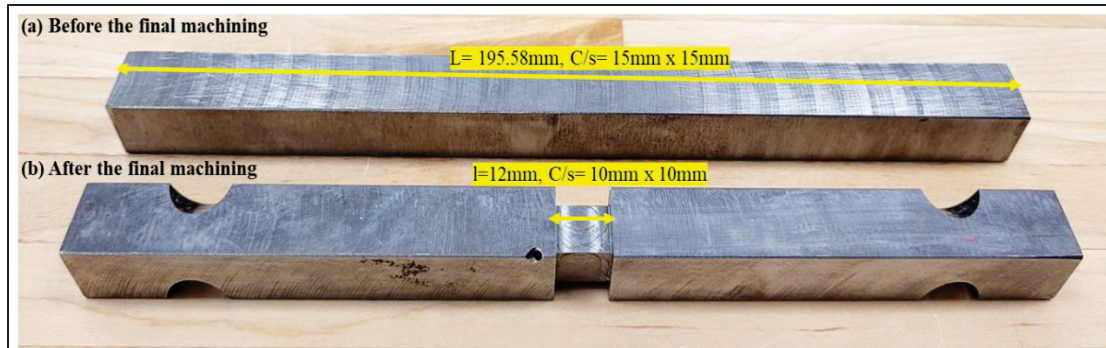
Specimen before (a); and after (b) the final machining of the square cross-section bar received from Finkl Steel
